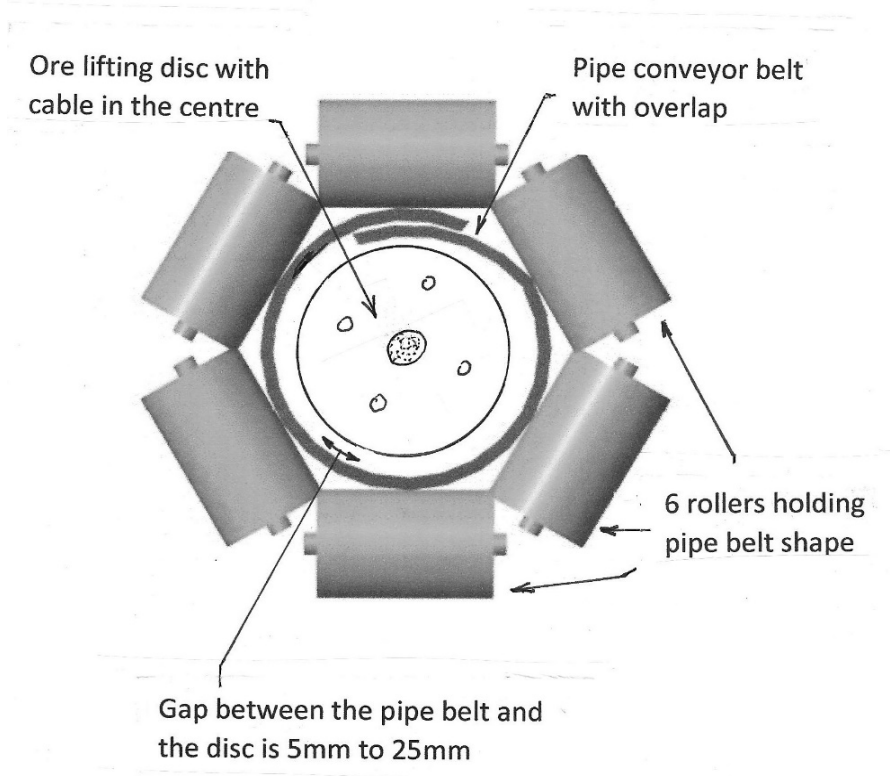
Drawing of the pipe conveyor section with the cable elevator disc in the centre.
